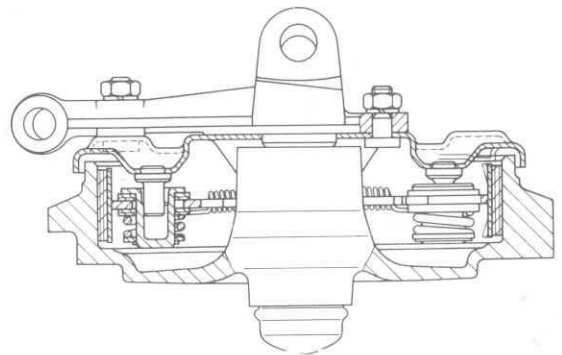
5 A section through a front brake. The self-adjusting device is shown in section on the left
